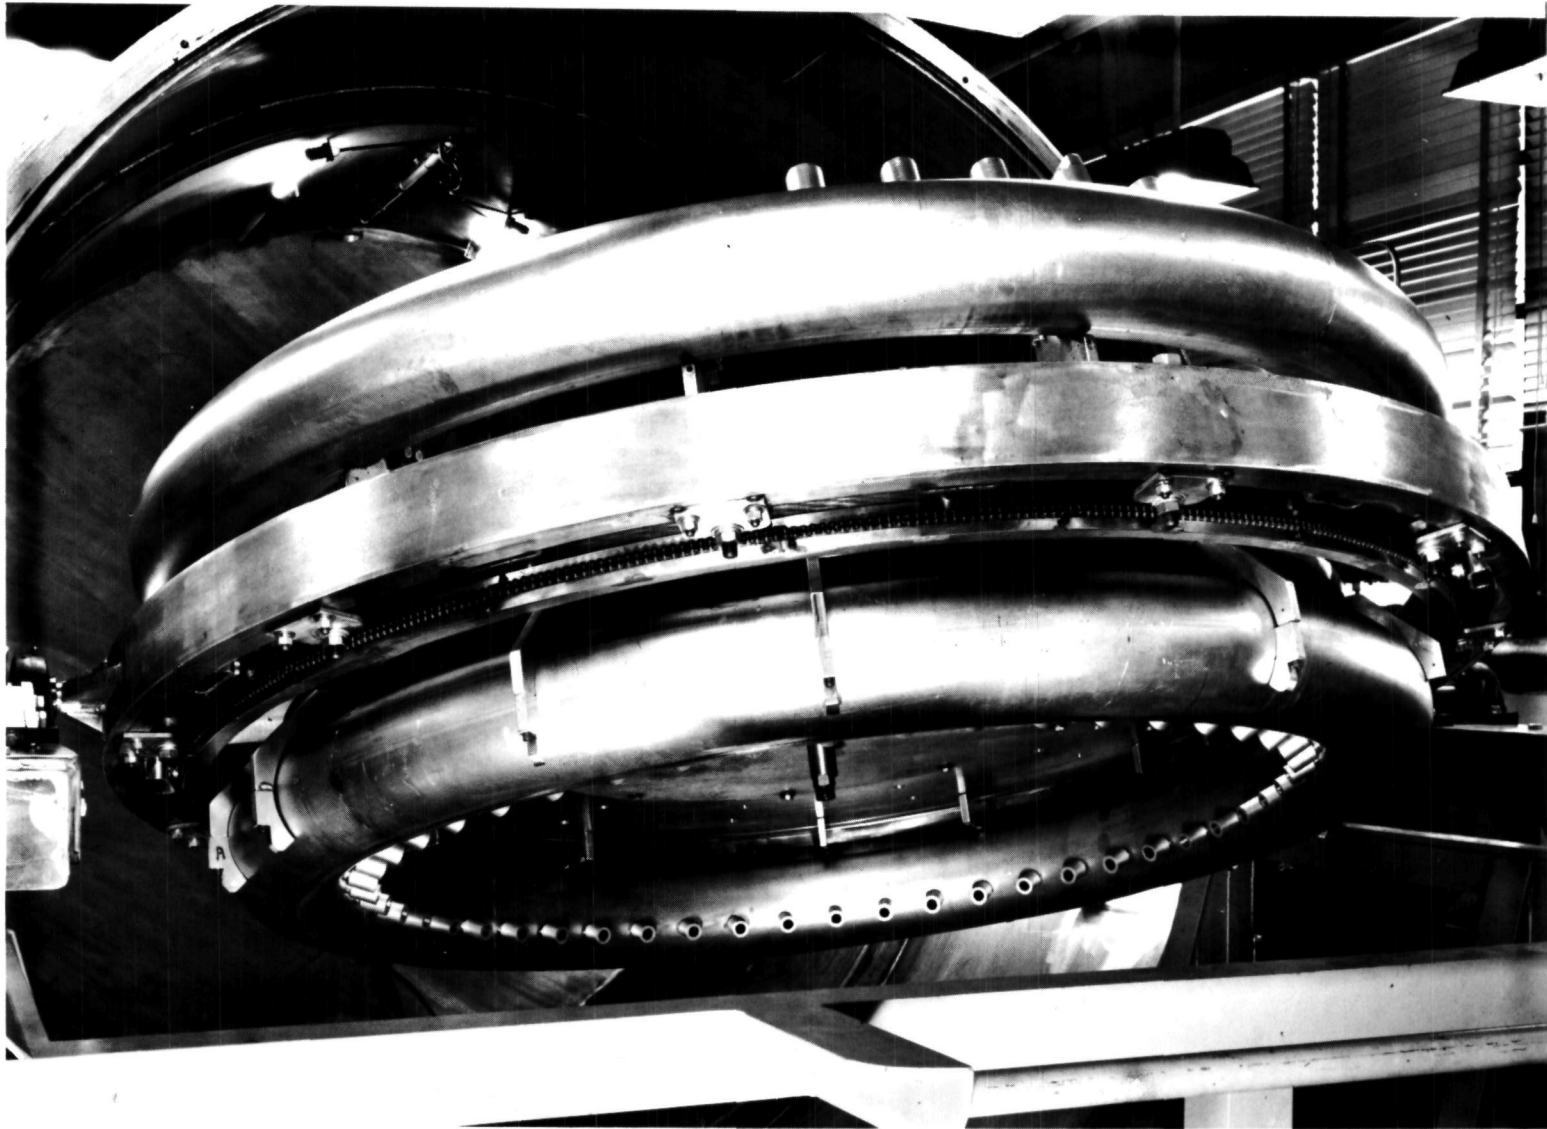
Inlet and Outlet Manifolds Mounted on Rotating Weld Fixture. Fixture Shown With Outlet Manifold Rotated to Lower Position After Tacking All 48 Bosses.
